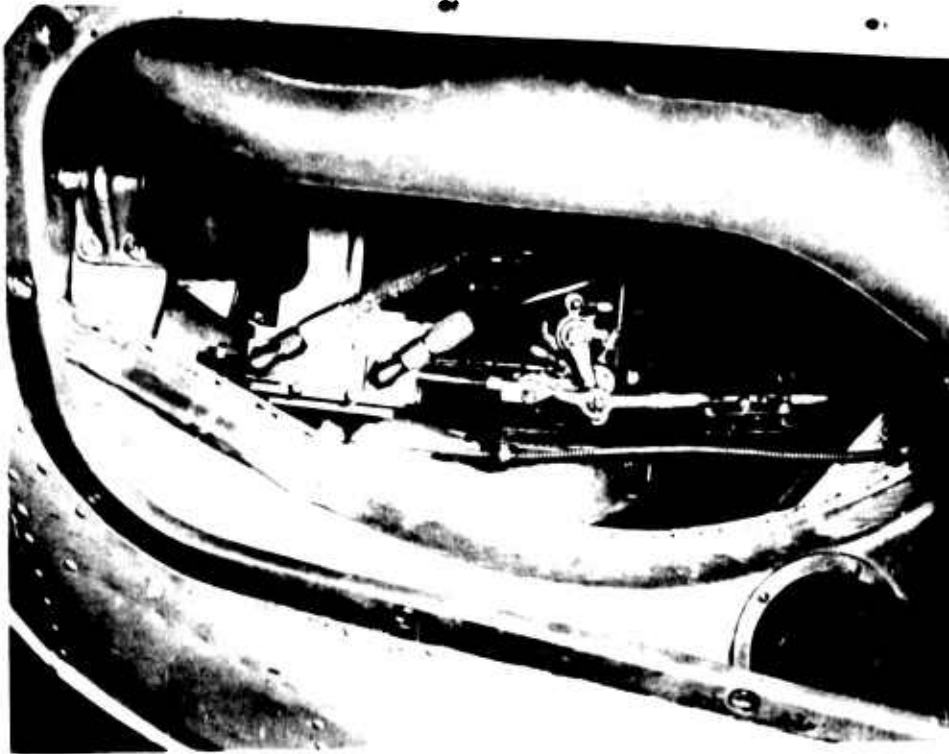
THROTTLE ACTUATOR INSTALLATION FOR THE
